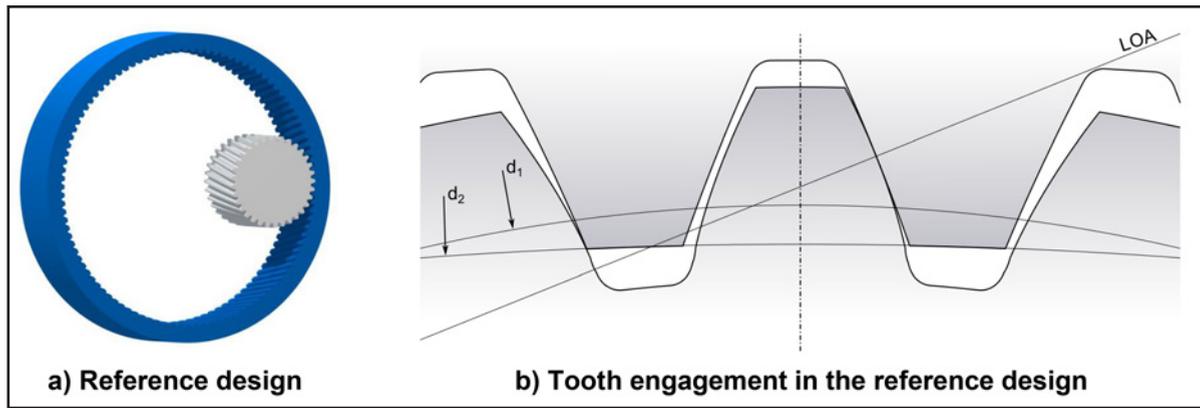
Reference design and tooth engagement in the external-internal gear stage.
